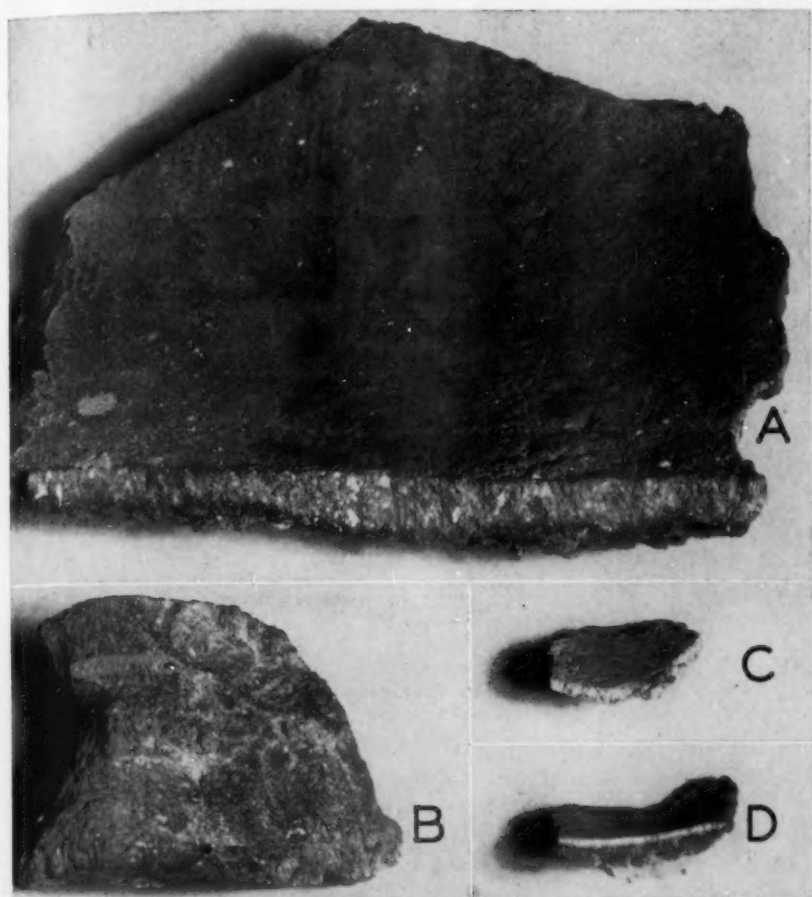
OXIDE TYPE OF PENETRATION DEFECTS. A—PENETRATION OF GRAY IRON THROUGH A LAYER OF MOLD WASH INTO THE FACE OF THE MOLD. B—PORTION OF SAND CORE SHOWING COMPLETE PENETRATION BY METAL. C—PENETRATION DEFECT WHERE SILICA FLOUR WASH WAS NOT USED. D—VIEW OF CASTING PEEL. METAL PENETRATED THROUGH SILICA FLOUR WASH, WHICH IS SHOWN AS WHITE LAYER.
